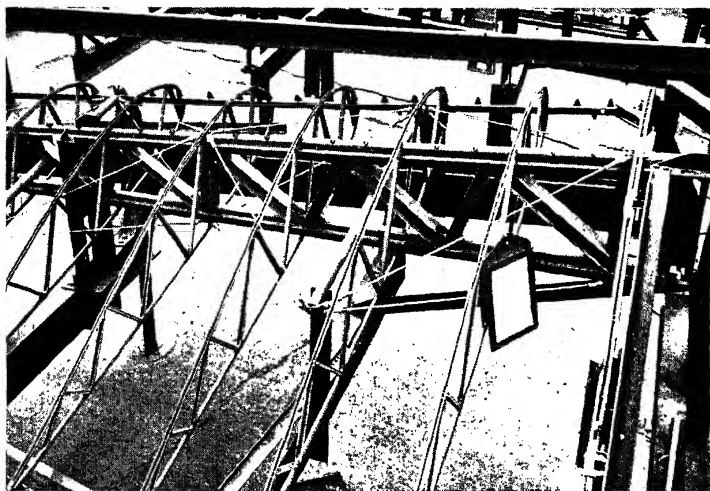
OUTER WING SPAR, WITH PYRAMID BRACING AND RIBS, ASSEMBLED ON WING JIG.
